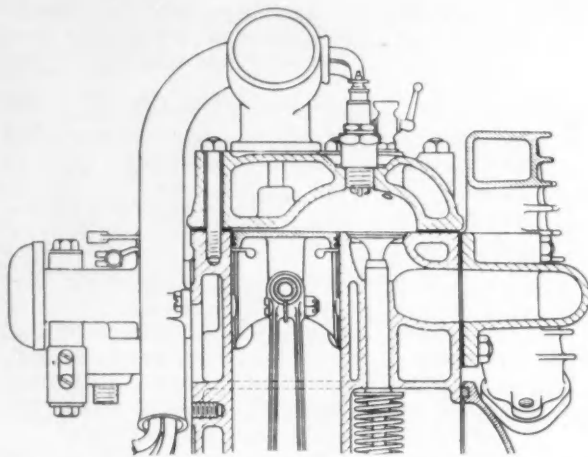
TOP OF RICARDO TURBULENT-HEAD ENGINE
